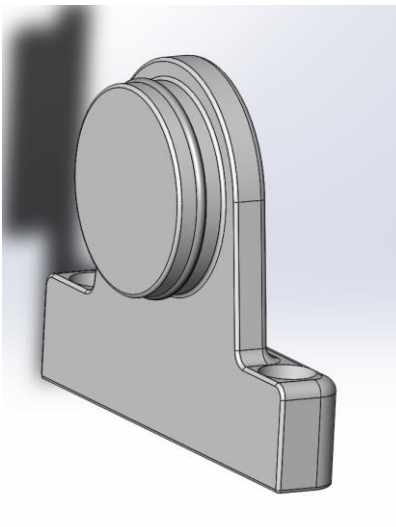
Medial attachment piece with O-ring around extrusion that interfaces with the motor
